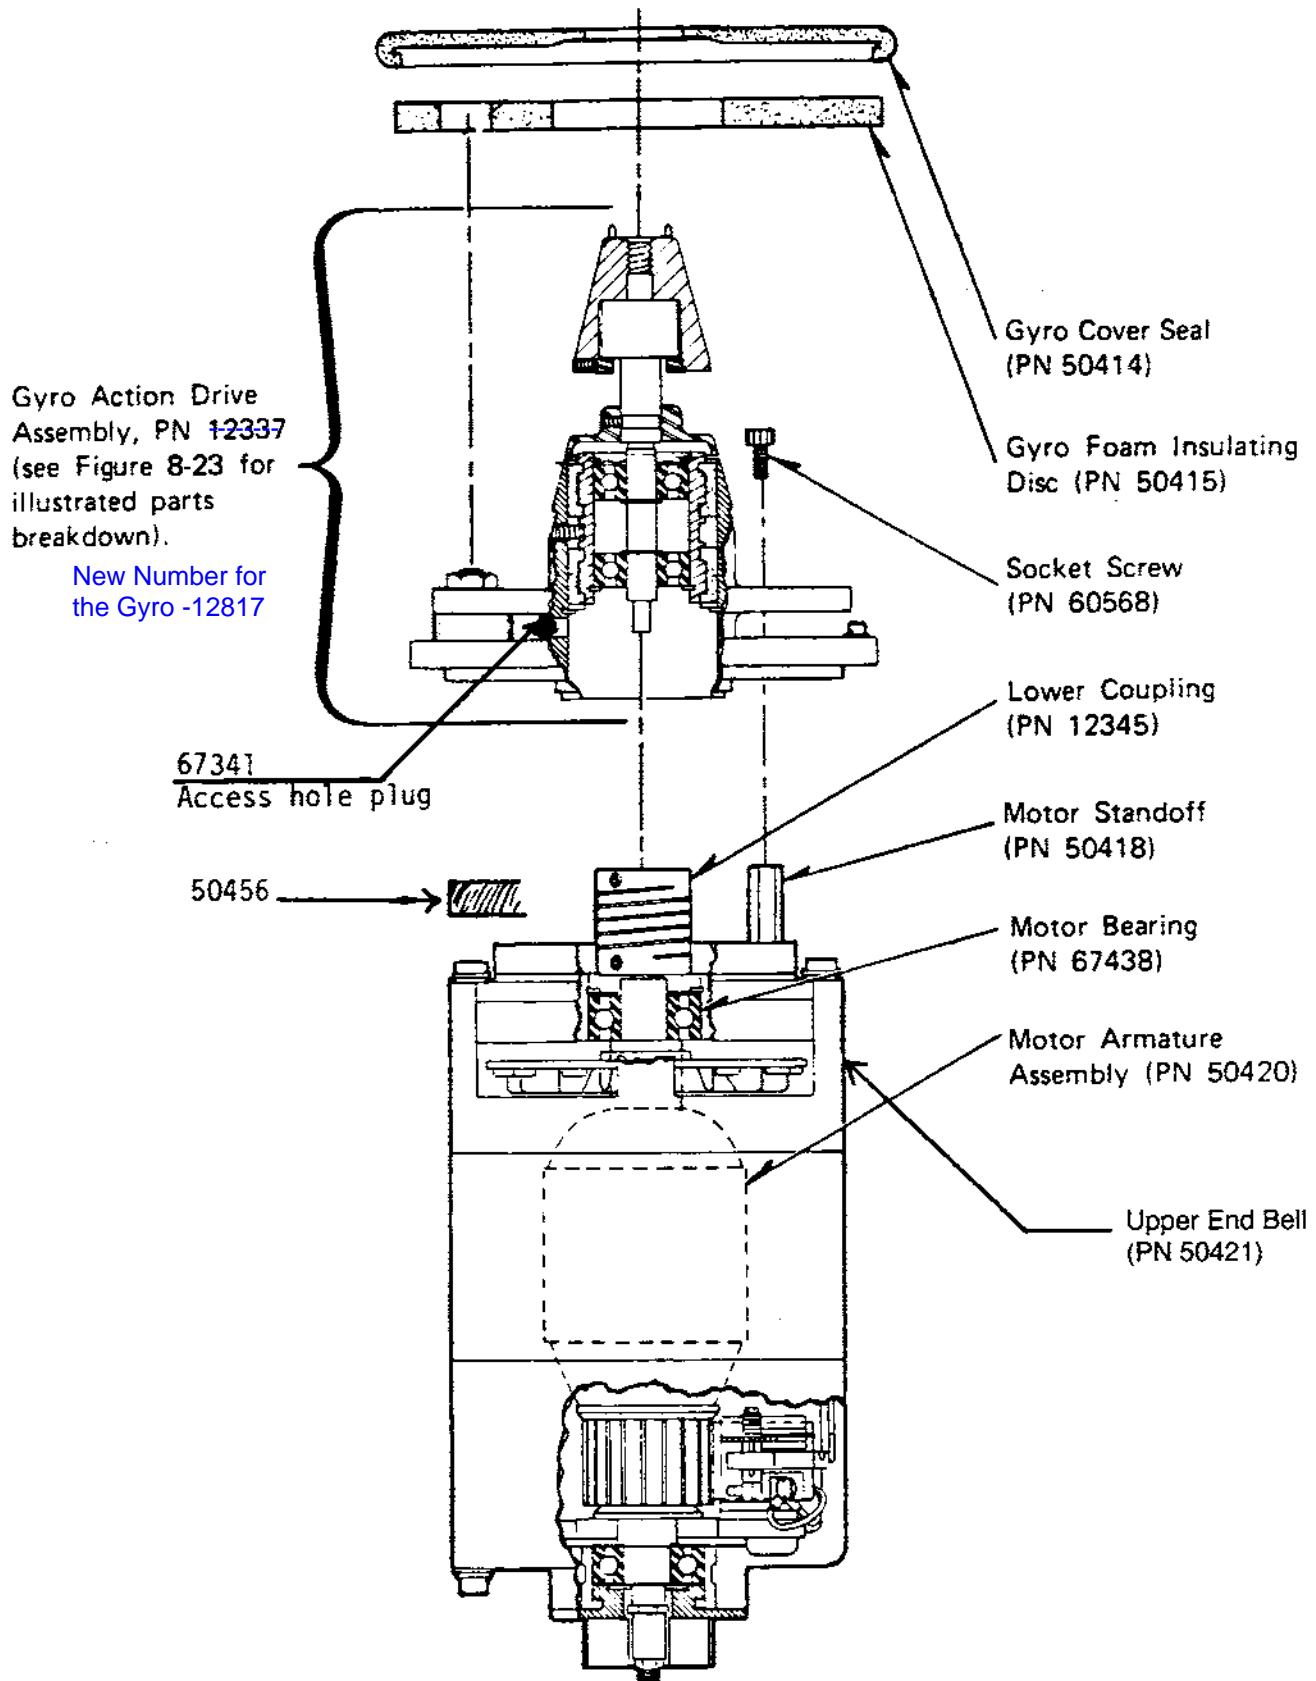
Parts Location: Gyro Action Drive, Lower Coupling and Motor Assembly (SN 8004600 and Higher)
